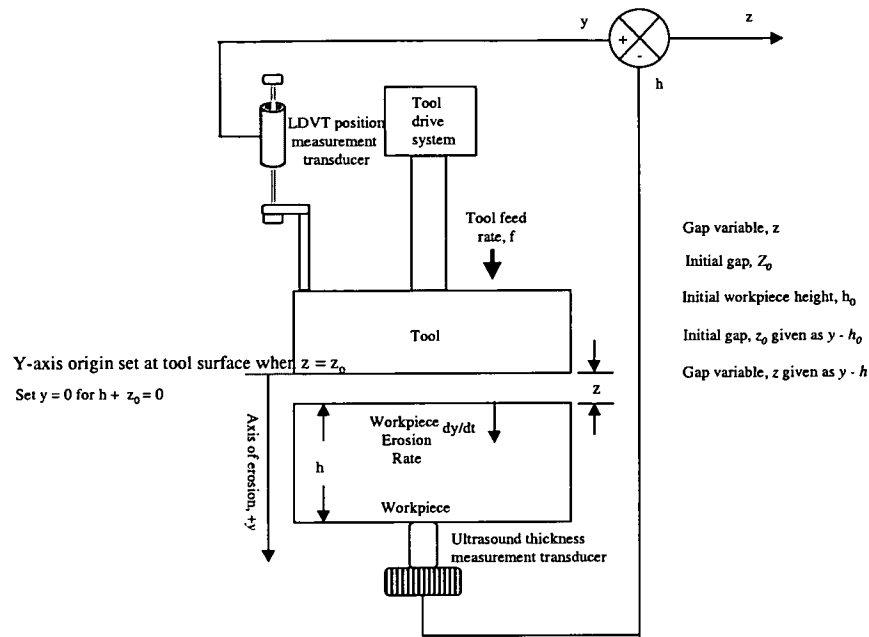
Tool and workpiece configuration and arrangement used for indirect gap measurement
